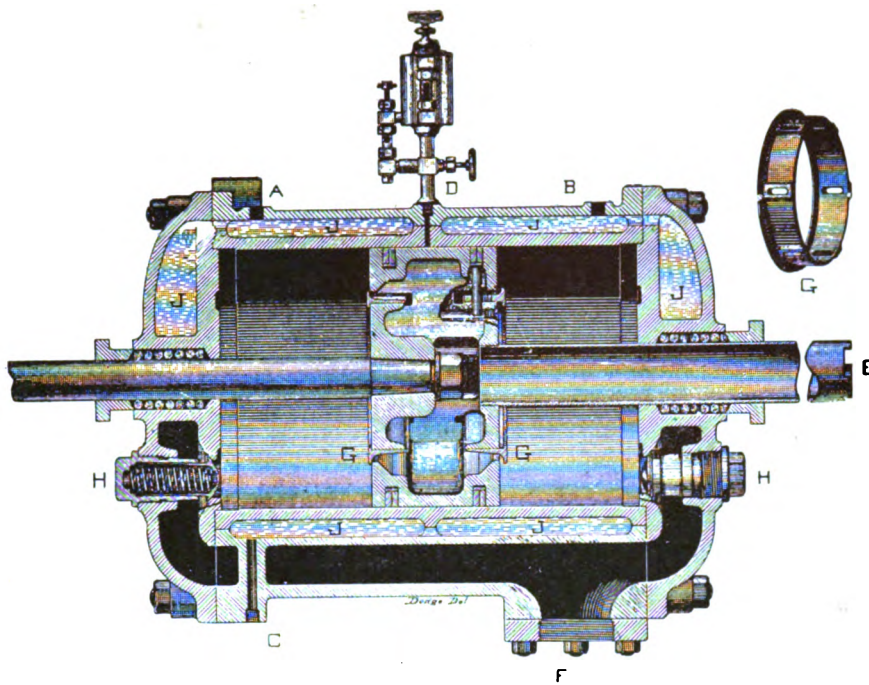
INGERSOLL-SERGEANT AIR COMPRESSOR CYLINDER.
